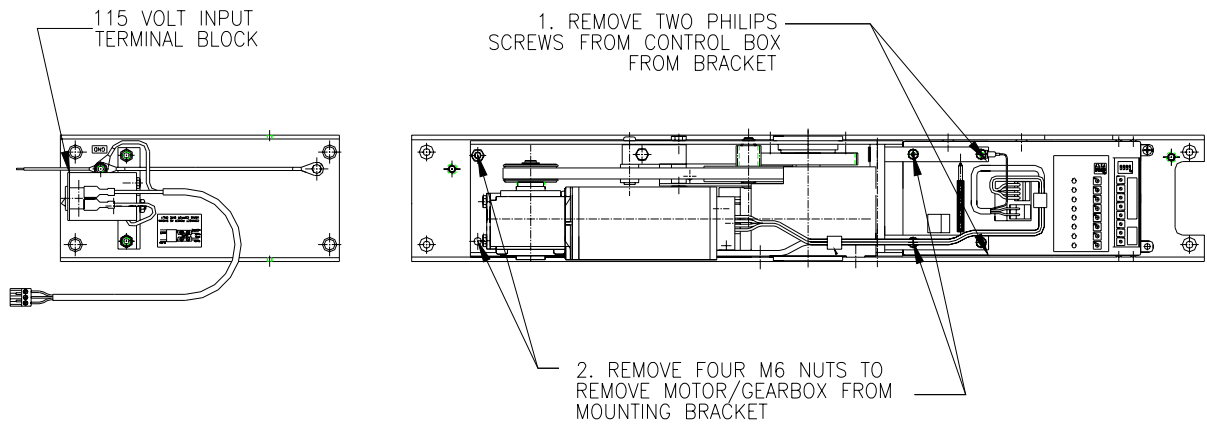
MOTOR/GEARBOX & CONTROL BOX REMOVAL
